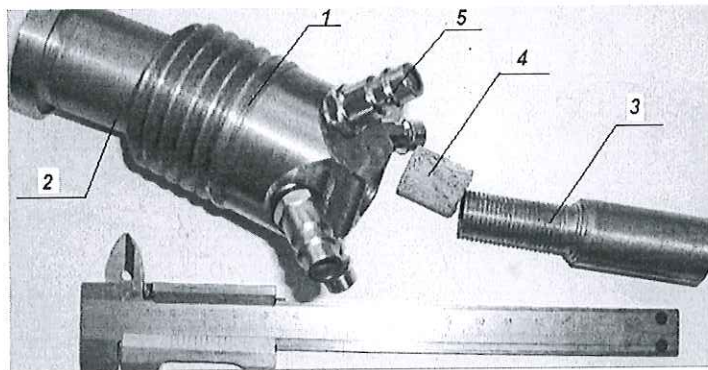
Basic parts of a newly designed nozzle for the abrasive jet machine: 1) body; 2) wide conical inlet; 3) narrow and long conical outlet; 4) porous cylindrical tubular insert; 5) air supply fittings
